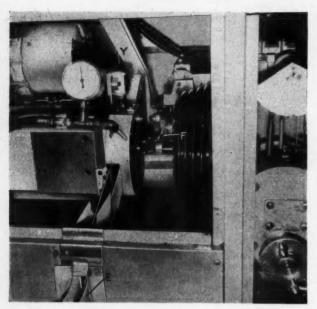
Bryant Centalign machine set-up for bore grinding inner races to 40 mm. diameter. The example seen is one of three originally installed in the pilot plant and is equipped for "post-gauging"
